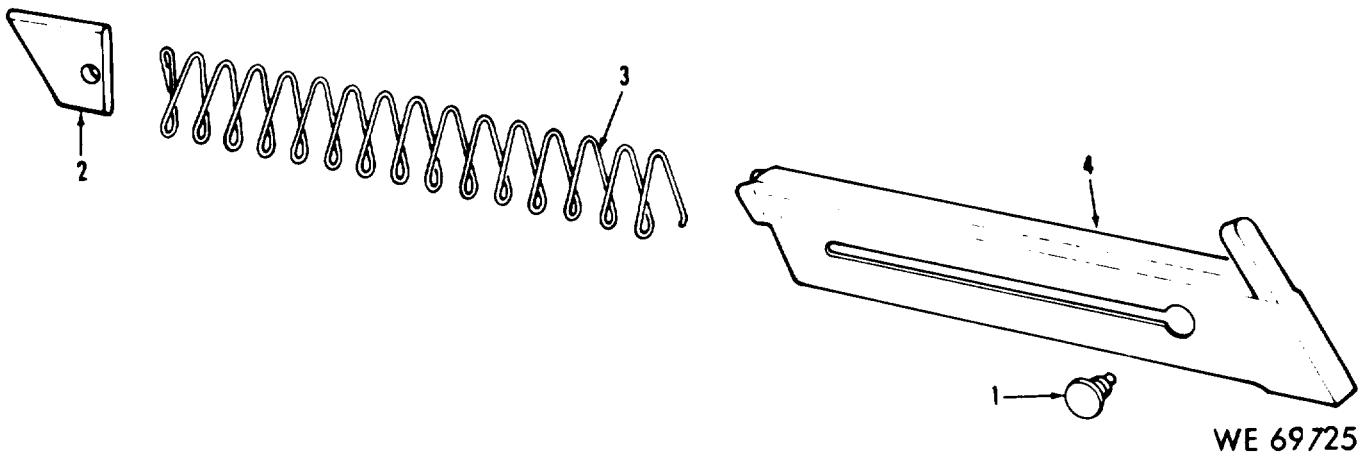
Magazine assembly for Hi-Standard Supermatic Tournament cal. .22 automatic pistol-exploded view.
